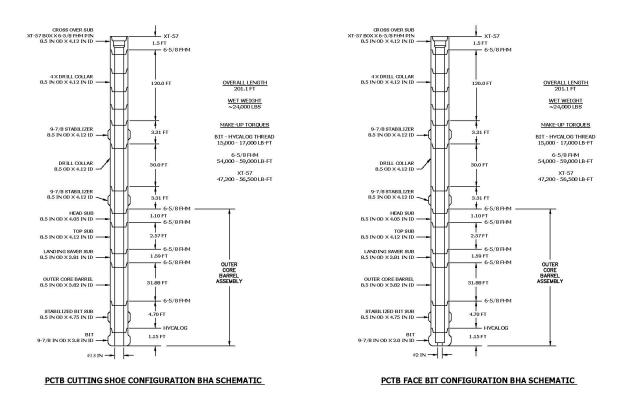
Drilling/Coring Bottom Hole Assemblies Configurations (Flemings et al., 2018).
